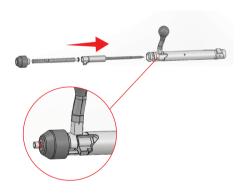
Spring in the firing pin assembly will push the firing pin and follower outside of the bolt.
